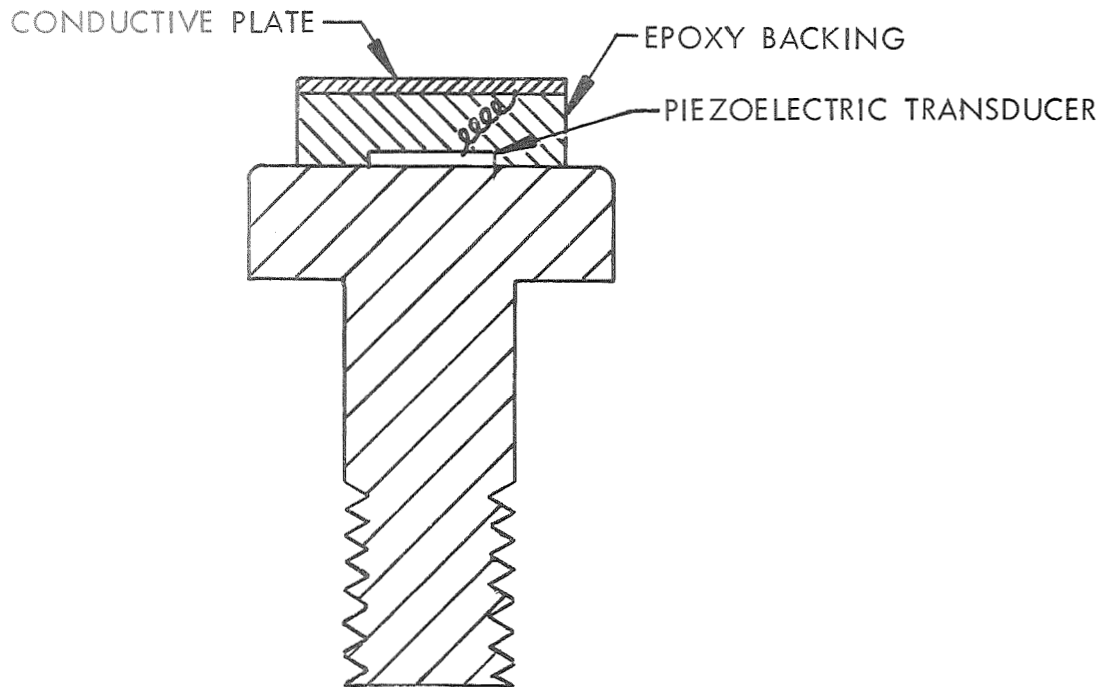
Cross-Sectional View of Small Cylindrical Transducer Unit Mounted on Bolt Head. A small spring clip affixed to the wrench will make electrical contact with the conductive plate during torquing operations.
